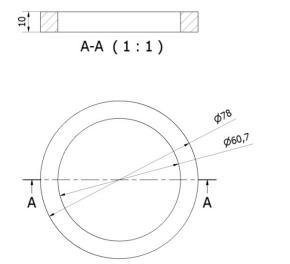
Aluminium Ring Insert for CCCC Mould
